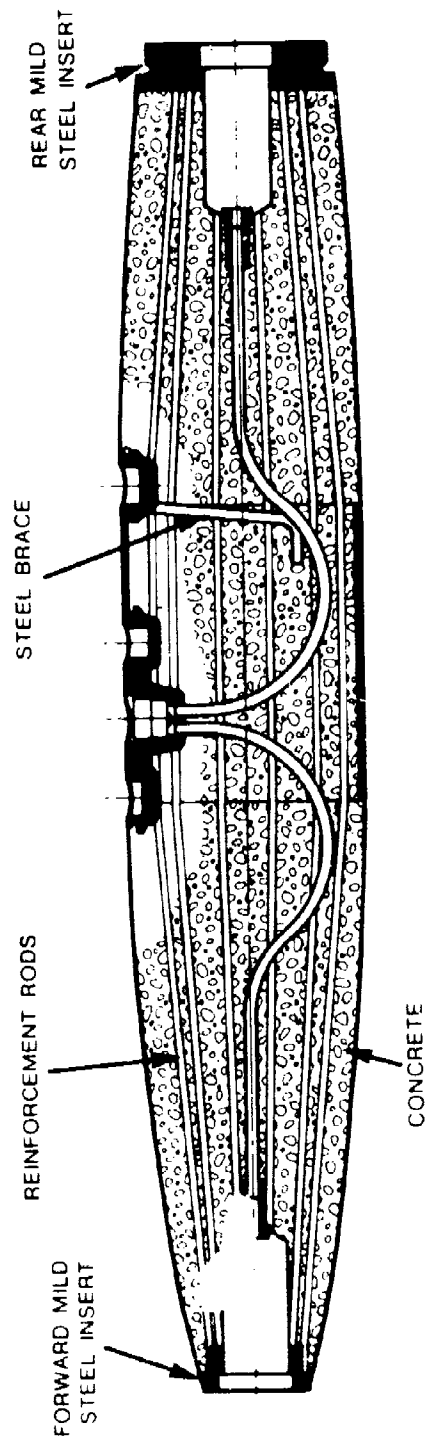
Proposed Steel Reinforced Concrete Bomb.
